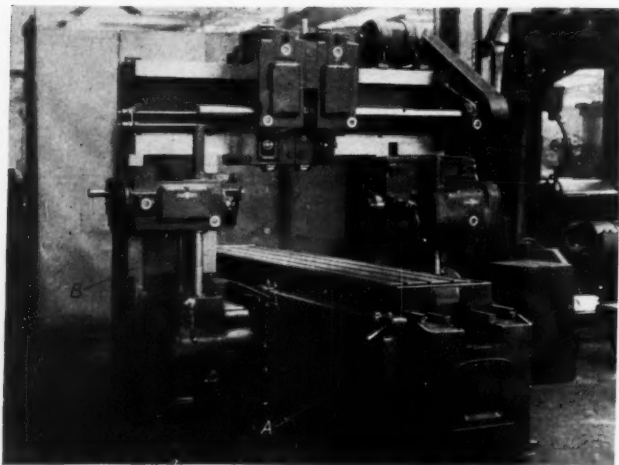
Standard castings are used for uprights and rail while special bed is welded
